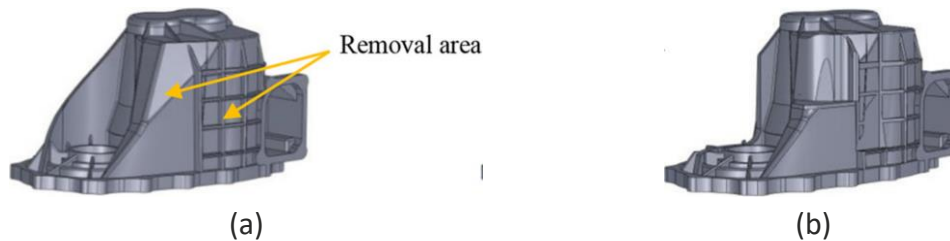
Transmission gearbox: (a) Initial design; (b) Optimized design [155]
